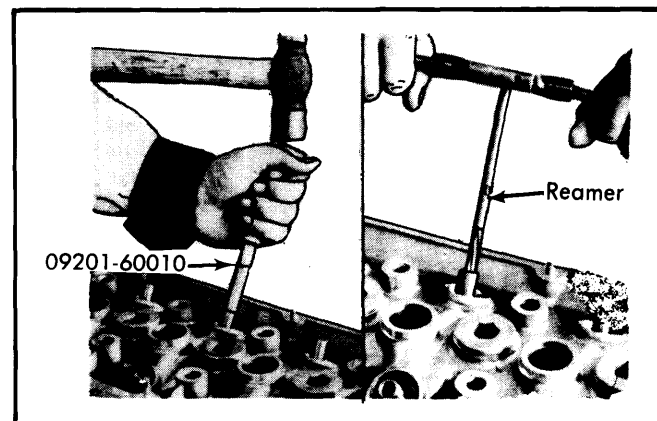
Removing Valve Guide Bushing and Reaming to Proper Clearance
